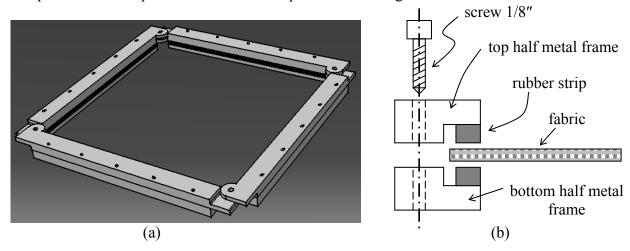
Experimental set-up used to induce shearing deformation to fabrics: (a) assembled fixture; (b) clamping system.
